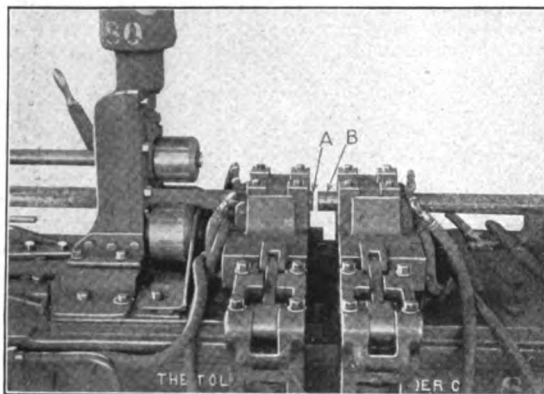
FLUE PARTS READY FOR WELDING
